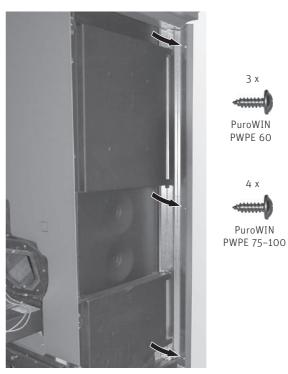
Attaching the side panel to the cladding bracket with screws (Illustration PuroWIN PWPE 60)
